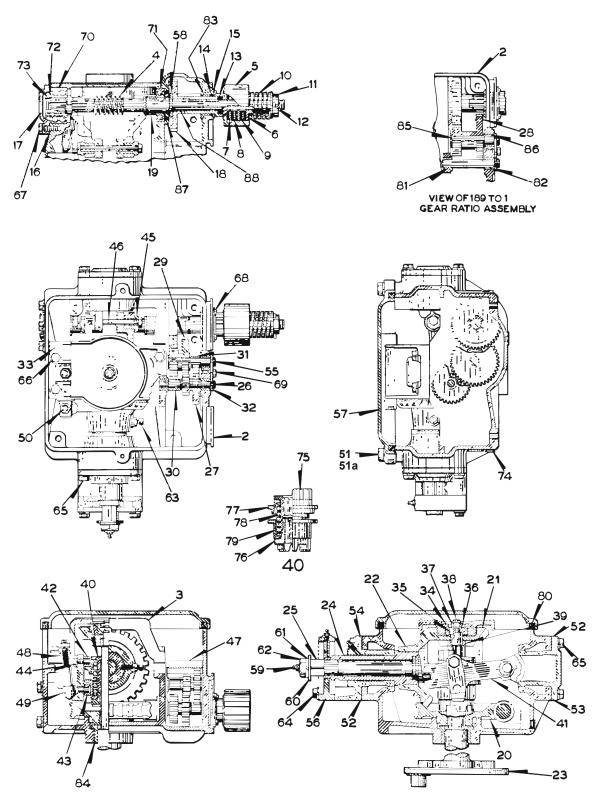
Gear Box for M-23A and M-23B Switch Machines
